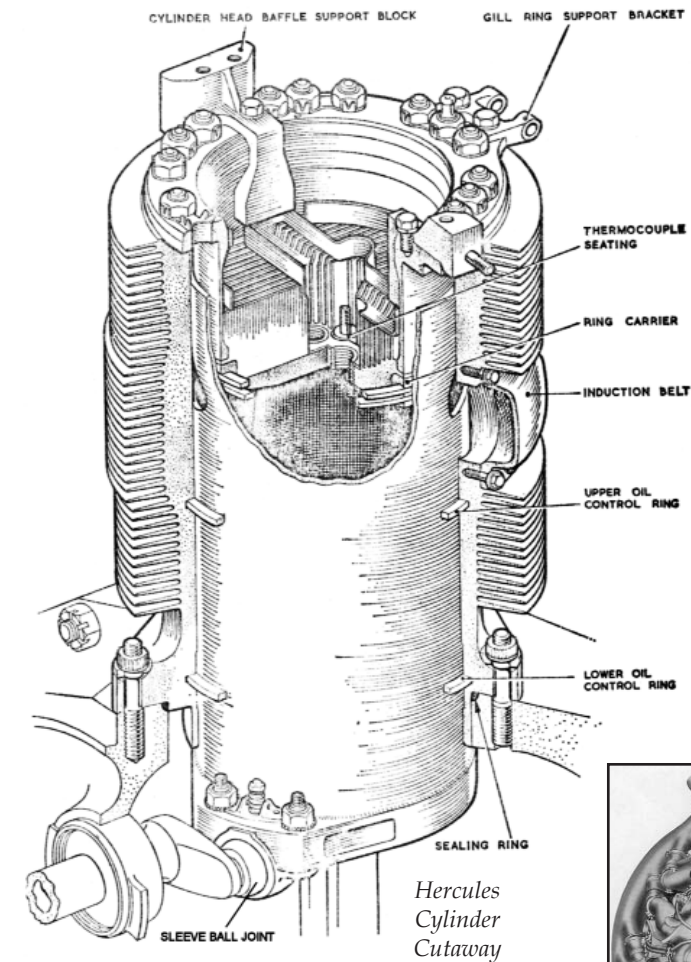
Bristol Sleeve-Valve Cylinder Detail
